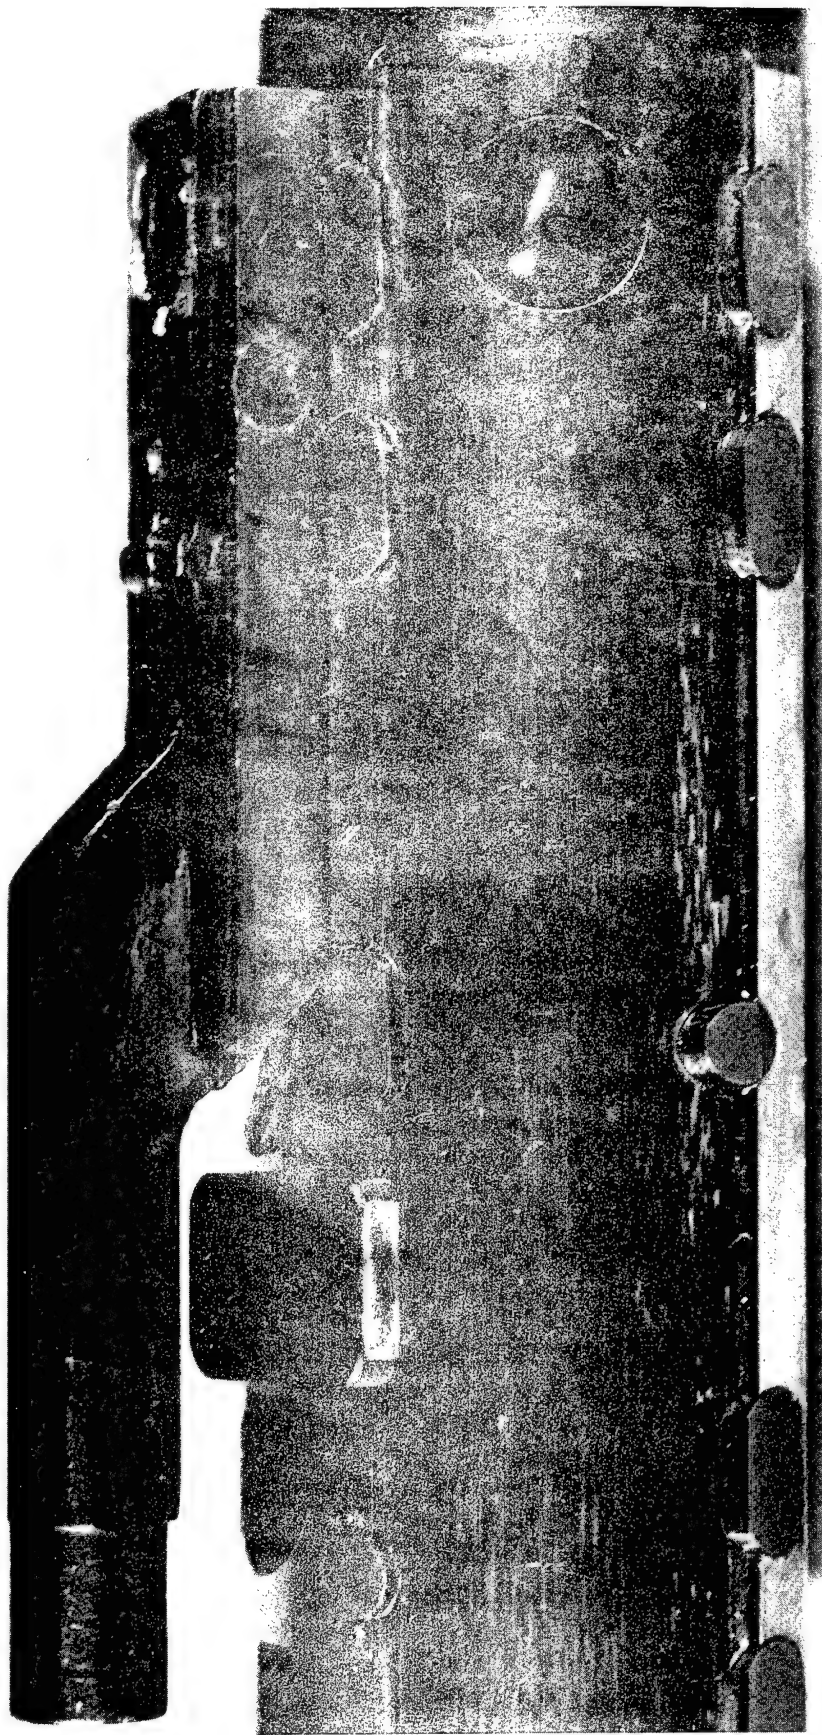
Left Side View of Bolt Carrier With Inserts Ready for Test.
